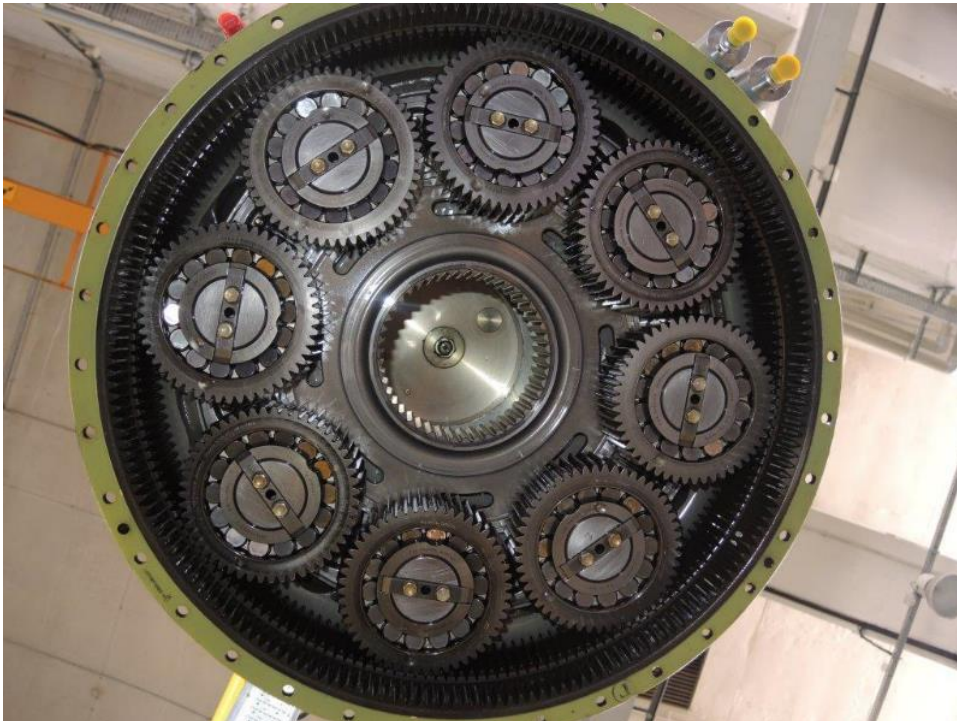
Eight second stage planet gears as fitted on the carrier inside the ring gear, seen from below (first stage gears and carrier is not shown). Photo: AIBN
